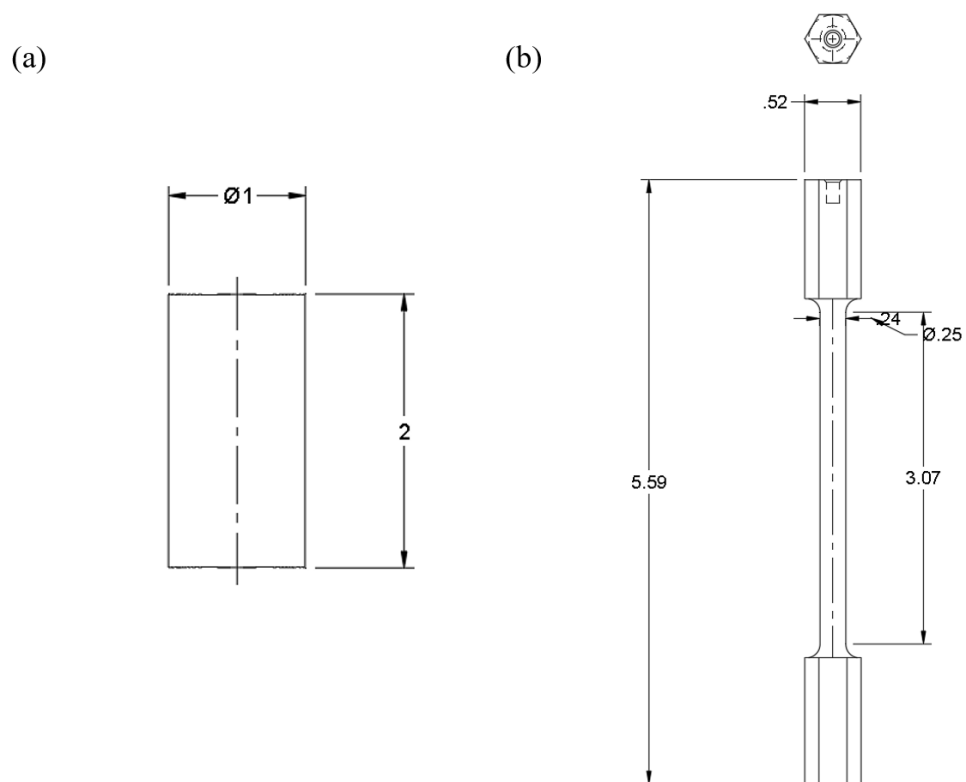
(a) Compression and (b) torsion specimen technical drawings
